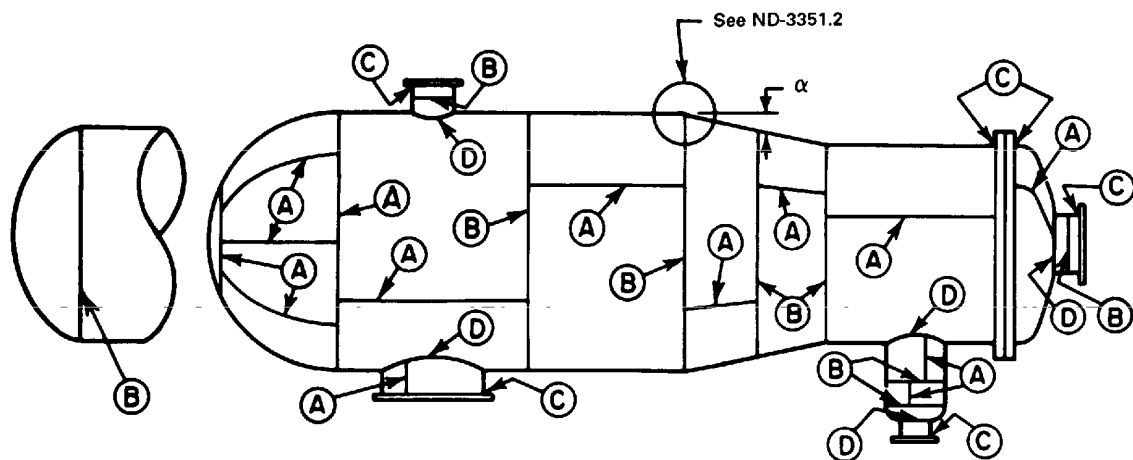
WELDED JOINT LOCATIONS TYPICAL OF CATEGORIES A, B, C, AND D
